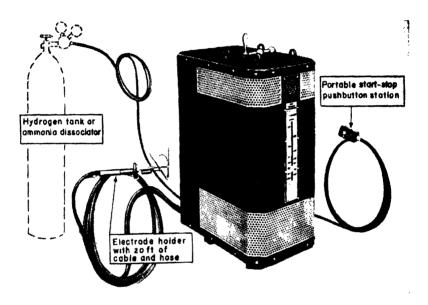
Atomic—Hydrogen welding apparatus
